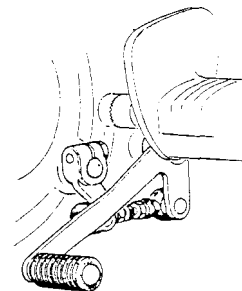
Illustrating the adjustable gear-change pedal mechanism
